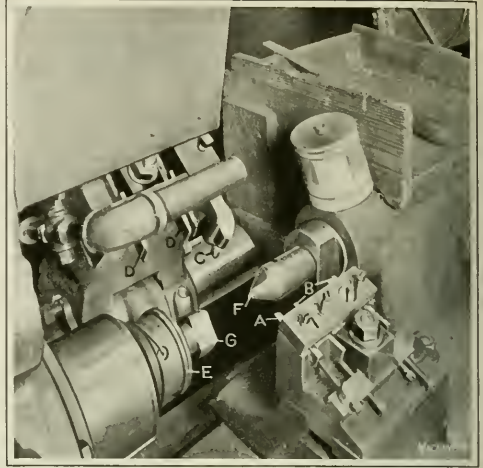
Automatic Lathe tooled up for facing Closed End, turning Outside Diameter, and roughing and finishing Piston-ring Grooves
